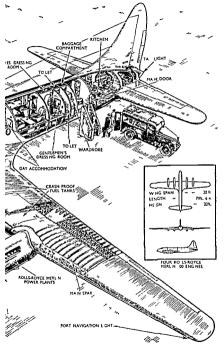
Prototype of the Avro Tudor I in part section, from a drawing reproduced in "Flight" Four Rolls Royce engines give this luxury passenger
